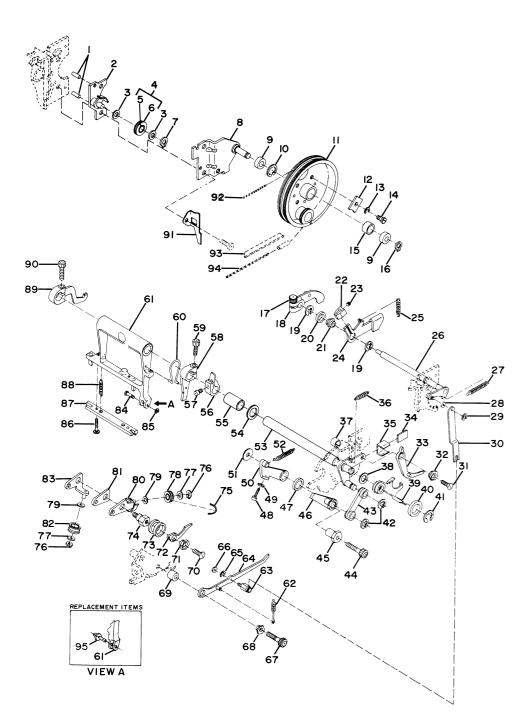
Takeup Drum and Linkage Assembly SL-4-03315B Figure 12
